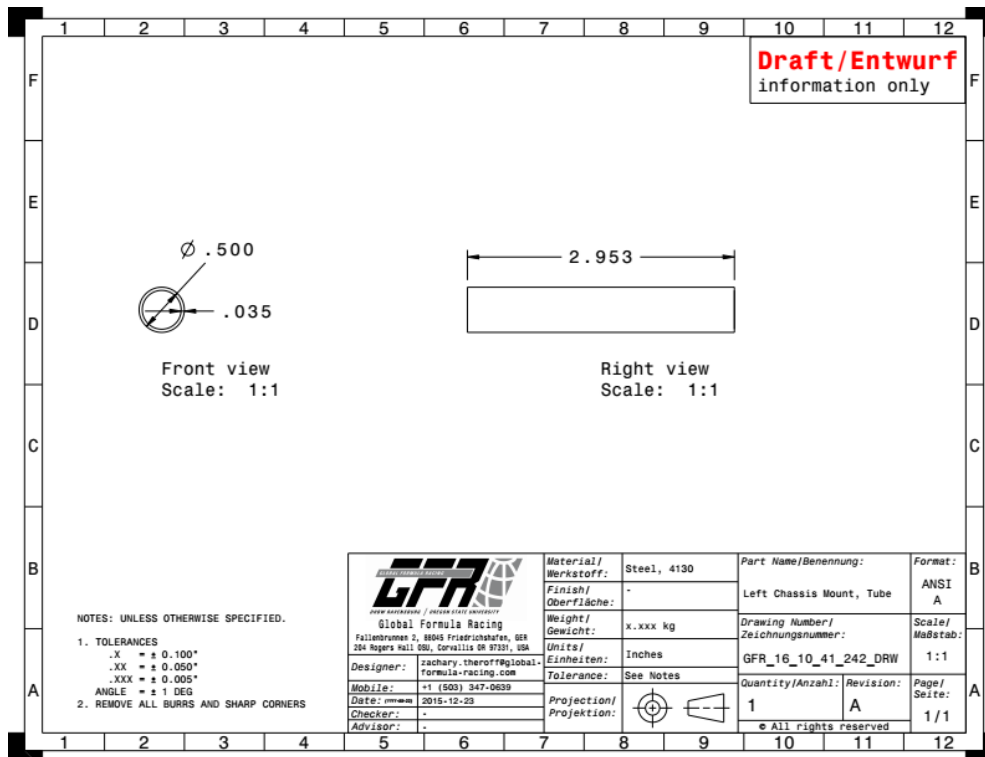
Chassis mount tube that extends rearward from the chassis, where the linkage tube is welded.
